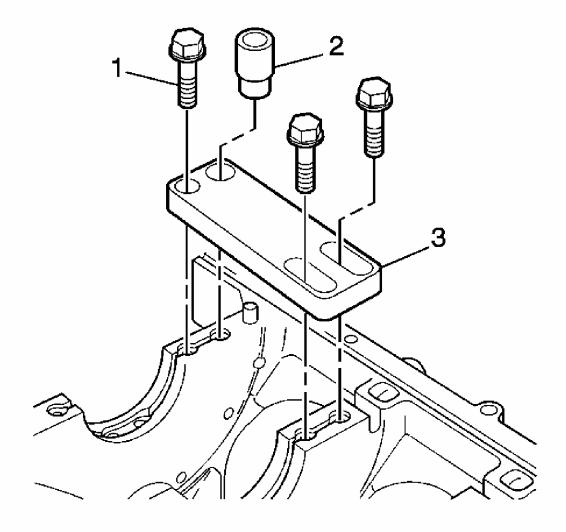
View Of Fixture Plate & Components - Crankshaft Main Bolt Hole Courtesy of GENERAL MOTORS CORP.
